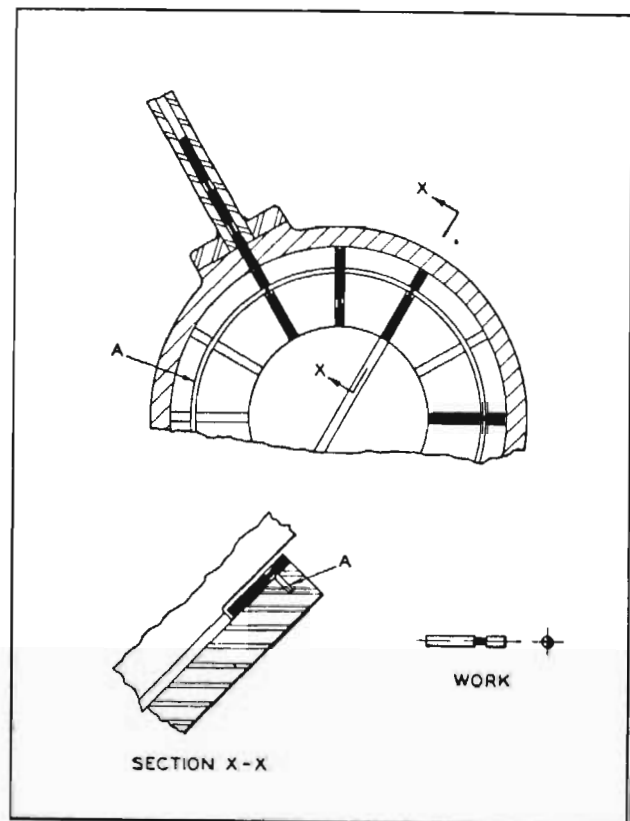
Parts of Shape Shown are Uniformly Positioned by Selector that Holds Incorrectly Located Parts until They are Turned Over.
